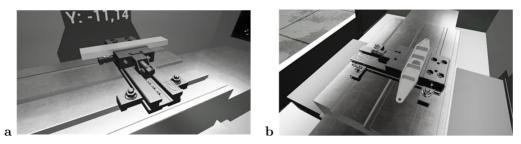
Fabrication of aircraft landing gear beam in the VR environment: (a) mounting of the semifinished product in a vice; (b) finished beam after the BV-represented fabrication process.
